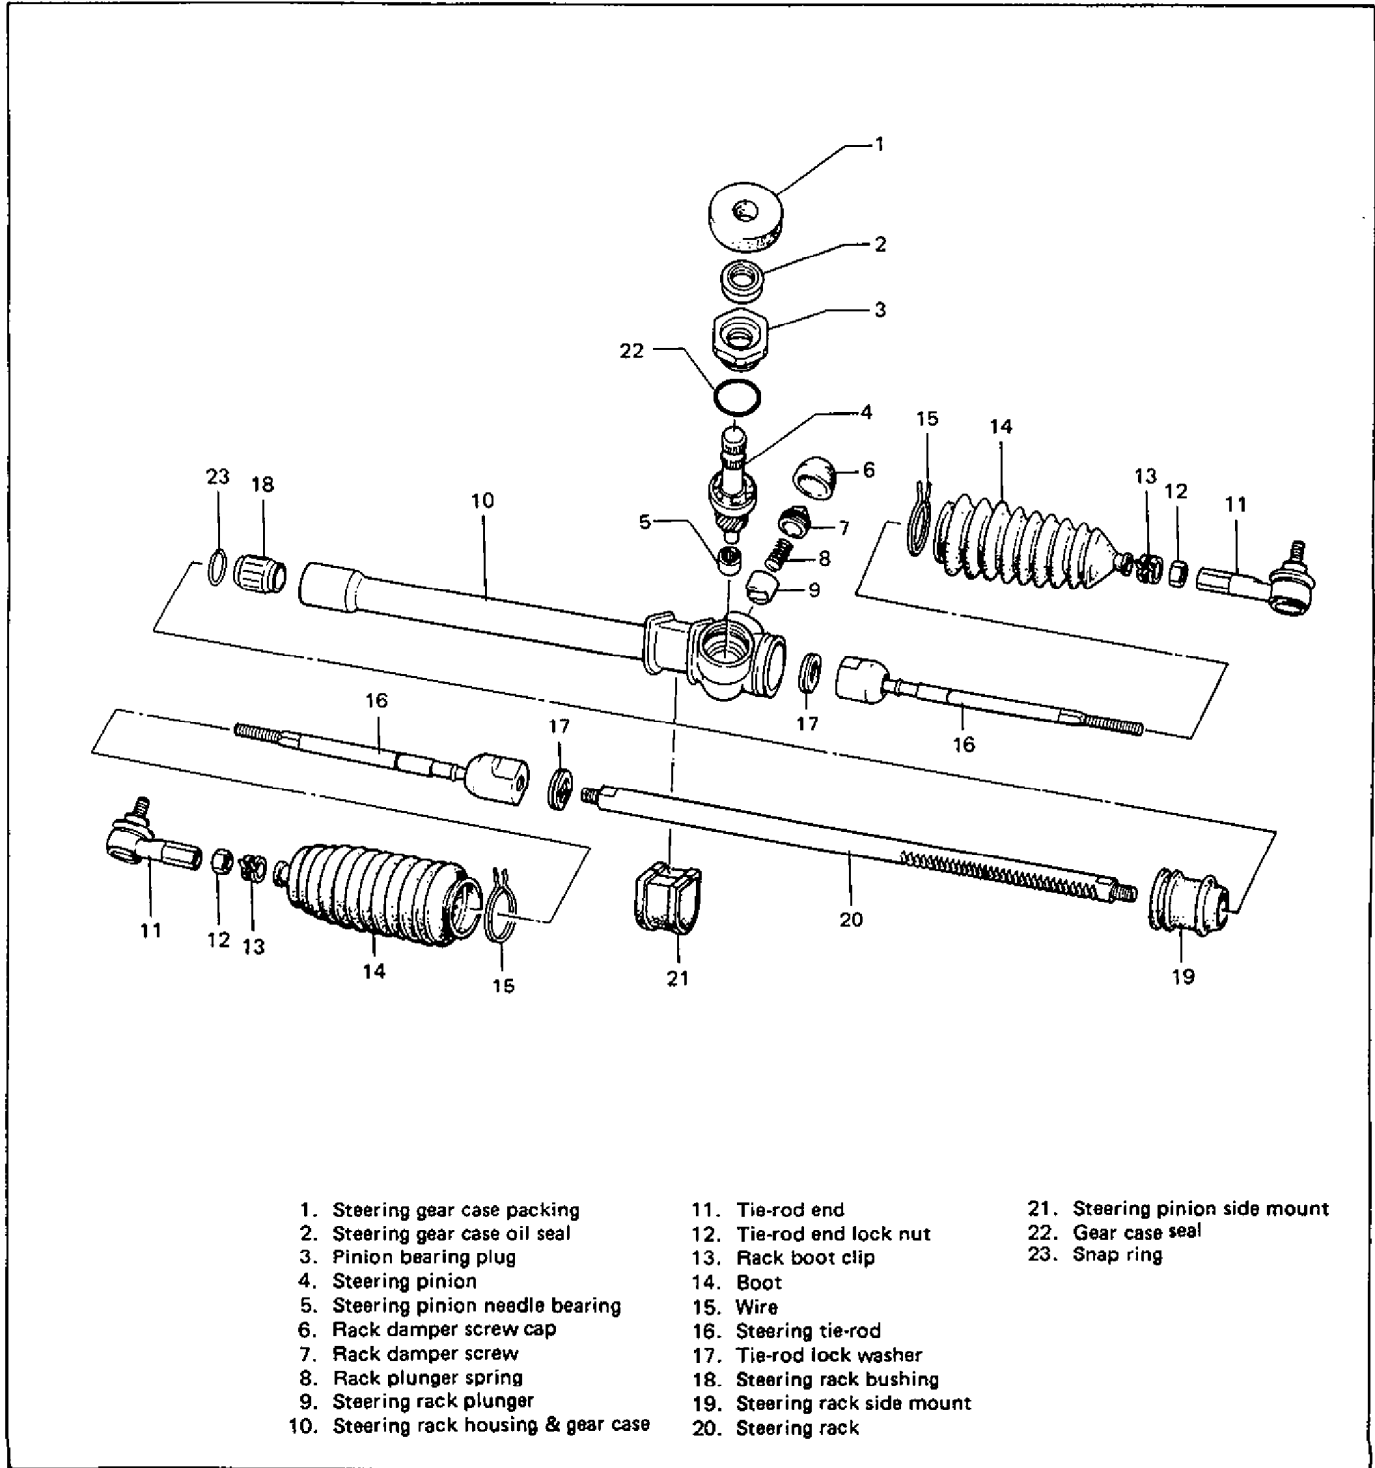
B-2 Exploded View of Manual Rack and Pinion
